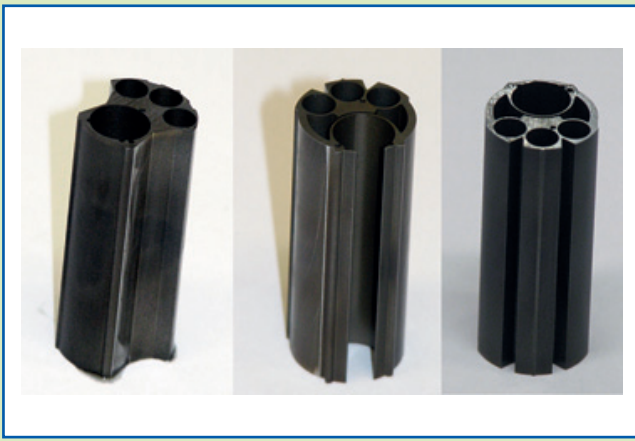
Various designs for the HICU specimen holders, machined by EDM
